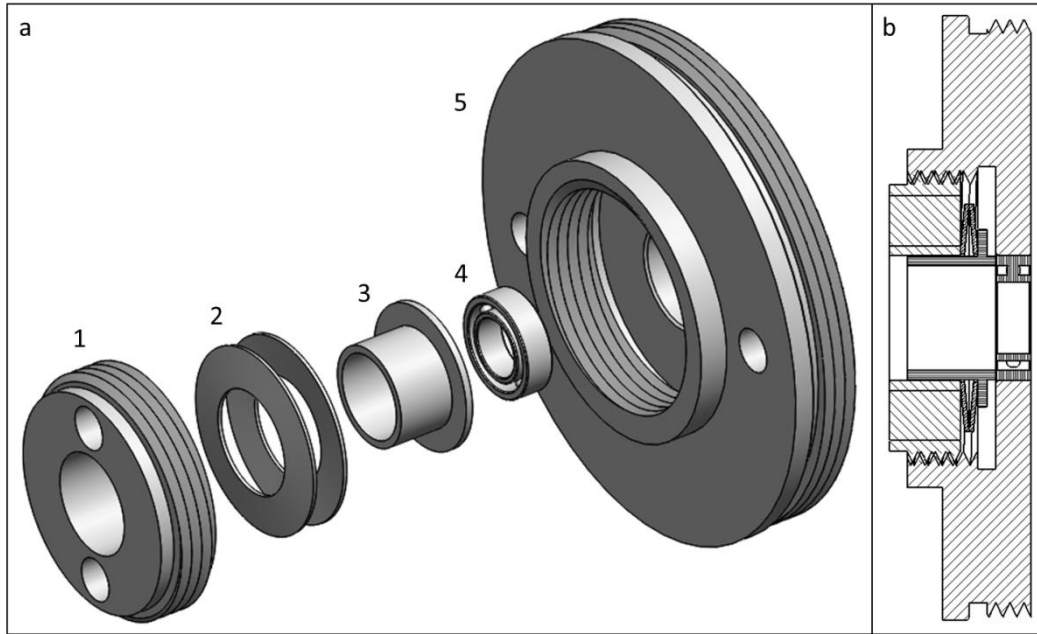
(a) Exploded view of the spin bearing assembly with parts: 1. Spin bearing cap, 2. Disc springs, 3. Pre-load sleeve, 4. Spin bearing, 5. Spin bearing holder. (b) Cross section view of assembly showing the pre-load on the outer race of the spin bearing.
